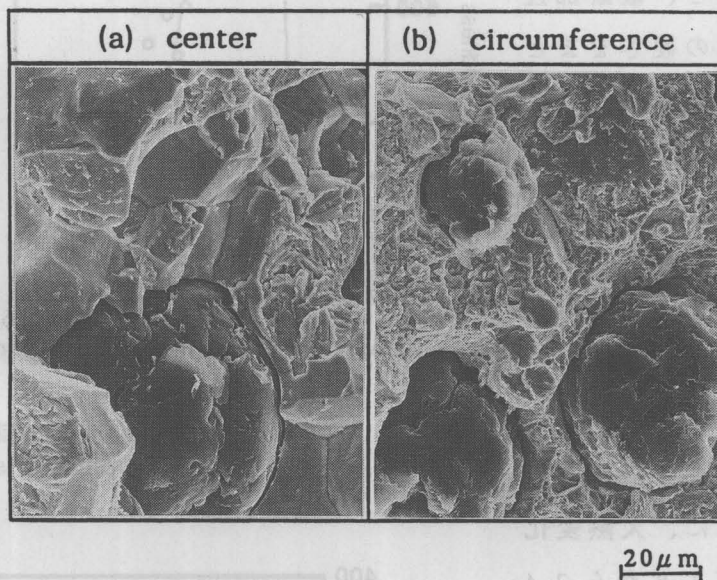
Fractographs of the specimen fractured at 384K, heat input : 2.1MJ/m, applied stress : 278MPa , (a) : center , (b) : circumference
